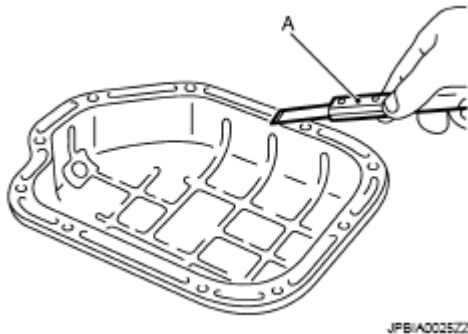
Using Scraper To Remove Old Liquid Gasket
